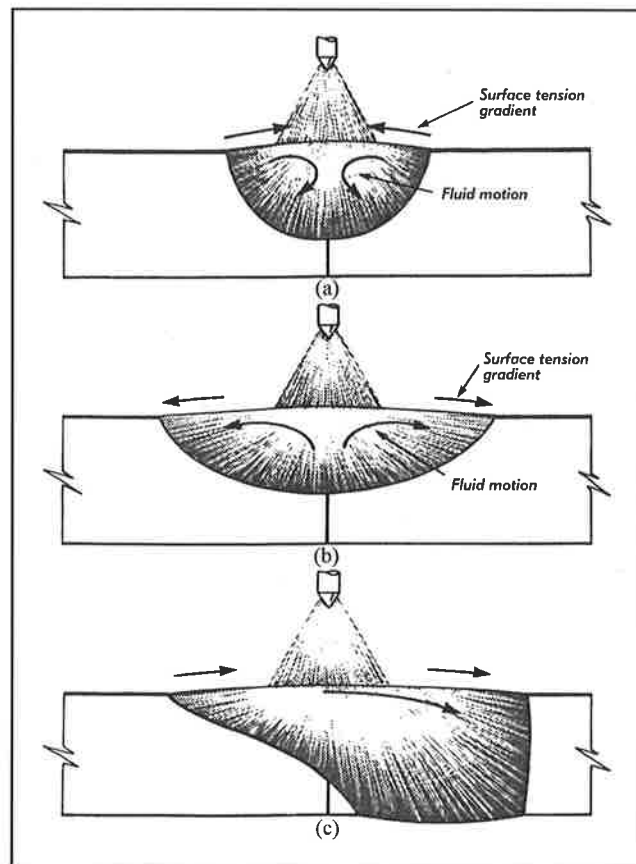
The effects of surface-active elements on weld pool convection and fusion zone geometry in GTAW weldments (after Lancaster, 1986): (a) surface-active elements present; (b) surface-active elements absent; (c) dissimilar materials.
